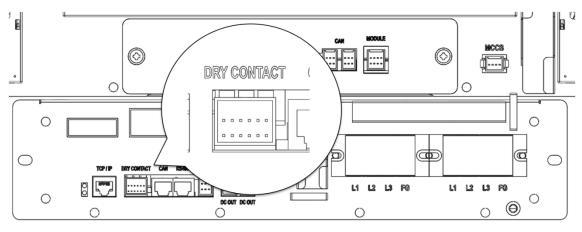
Dry Contact Cable Connection to SMPS Assembly
